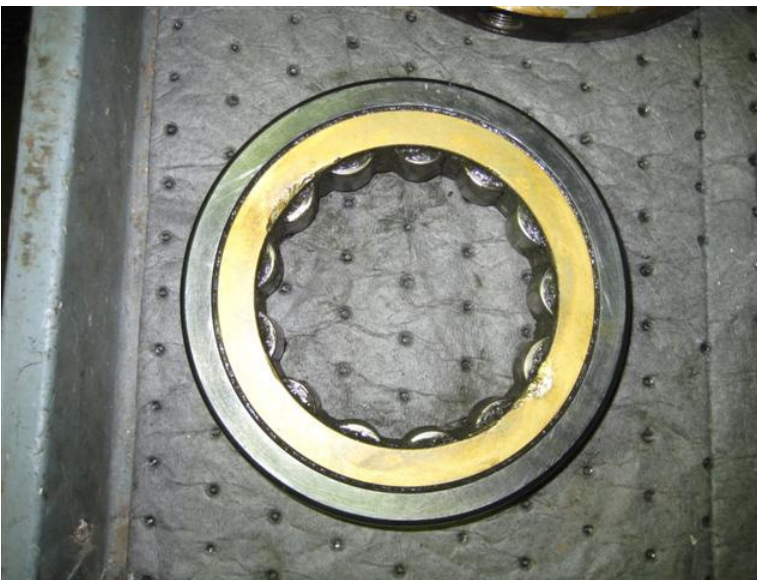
Photo of cylindrical roller bearing that was removed during the 12/2009 rebuild.
